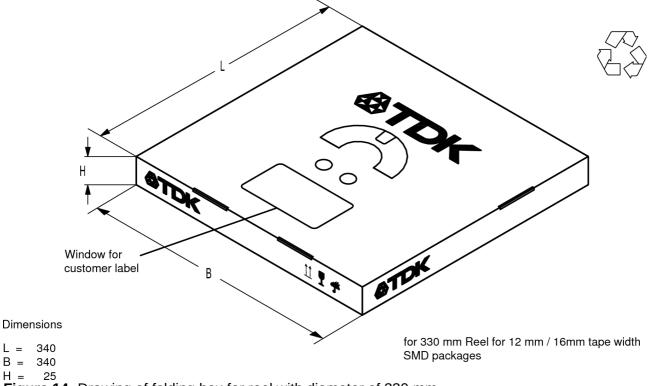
Drawing of folding box for reel with diameter of 330 mm.
